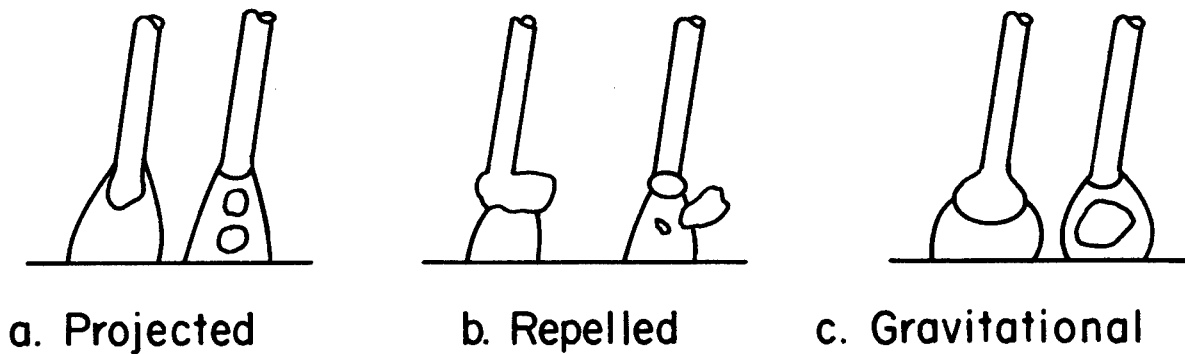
THREE TYPES OF FREE-FLIGHT METAL TRANSFER IN A WELDING ARC
